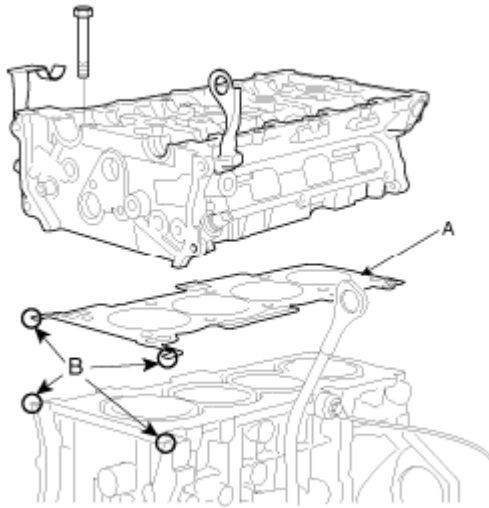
Identifying Cylinder Head Gasket On Cylinder Block
